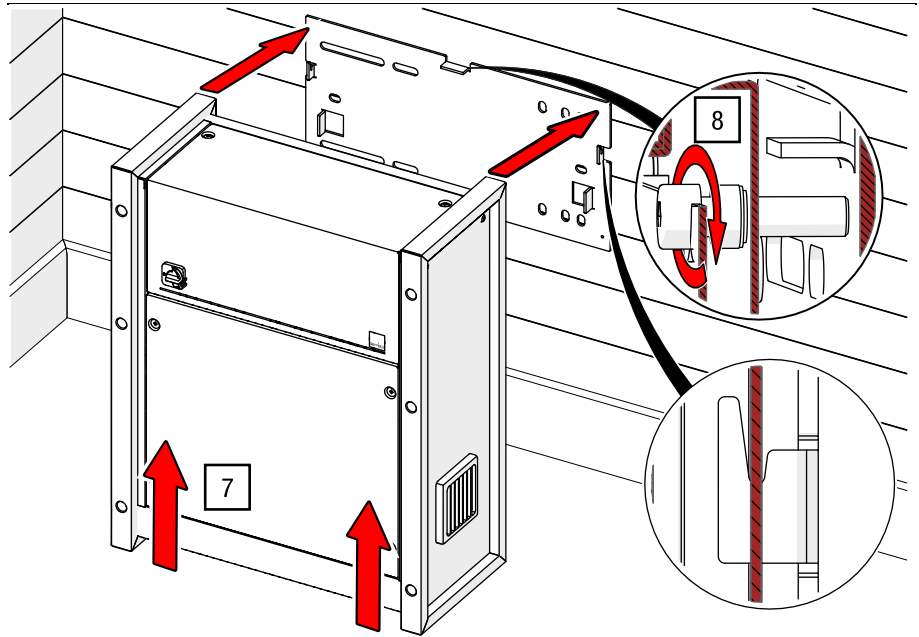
Fixing the control unit to the wall mounting plate (control unit model may vary)
